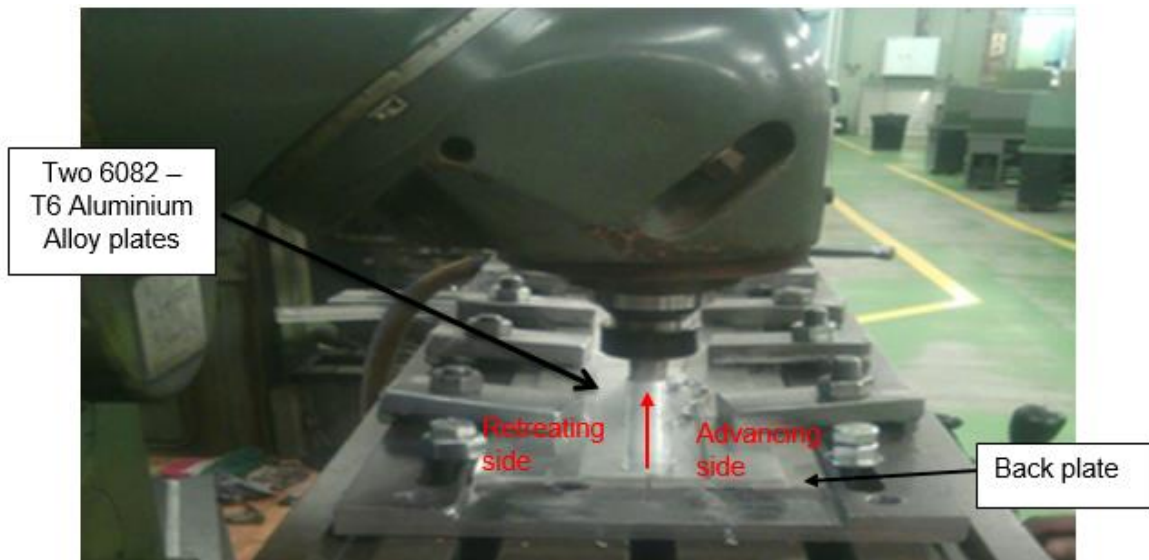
FSW setup of two 6082-T6 Al alloy plates
